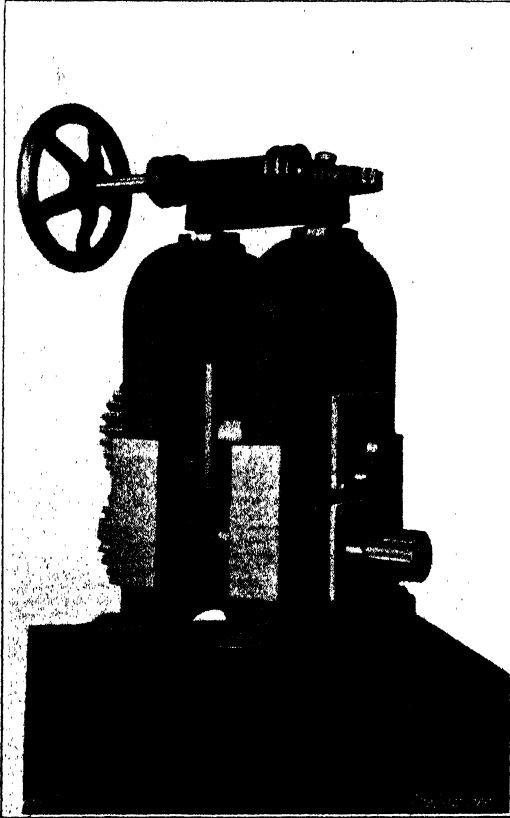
MILL FITTED WITH ROLLER BEARINGS.
